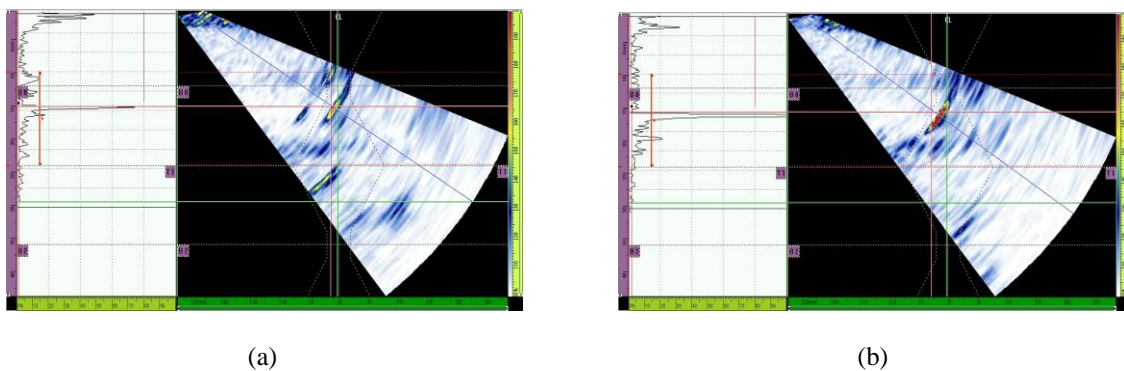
Sectorial scan of weld in sample 2 (a) at the starting of weld and (b) at the end of weld
